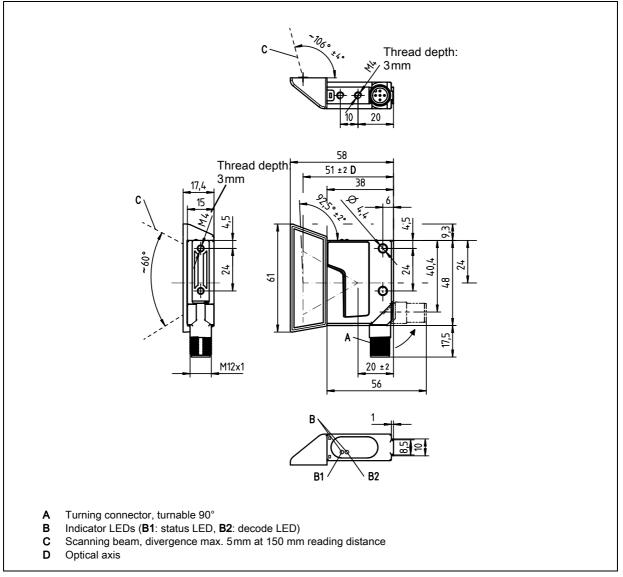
BPS 8 SM 100-01 dimensioned drawing
